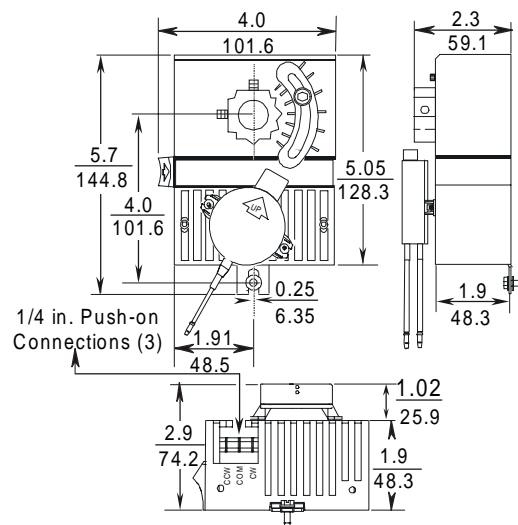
ATP-2040 Actuator/Transmitter Dimensions, in. (mm)
